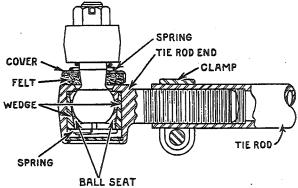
, Tie Rod Assembly—F-300, F-301_Axle
